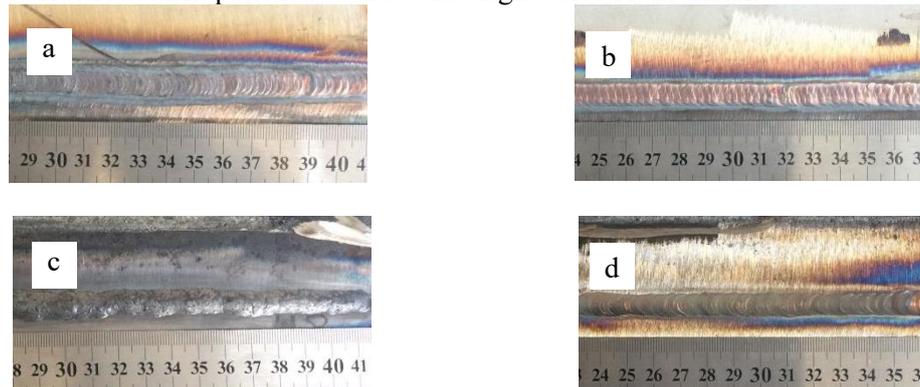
Macro morphology of weld surface. (a) The front of A-TIG welding (b) The front of the conventional TIG welding (c) The back of A-TIG welding (d) The back of conventional TIG welding
